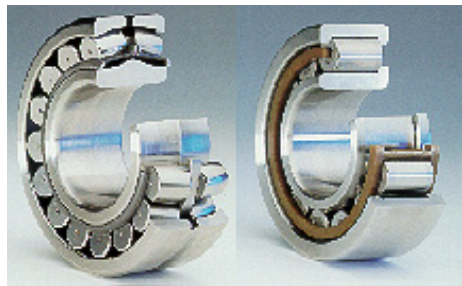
Examples of roller bearings: Spherical bearing (left) and cylindrical bearing (right). From SKF (1997).
